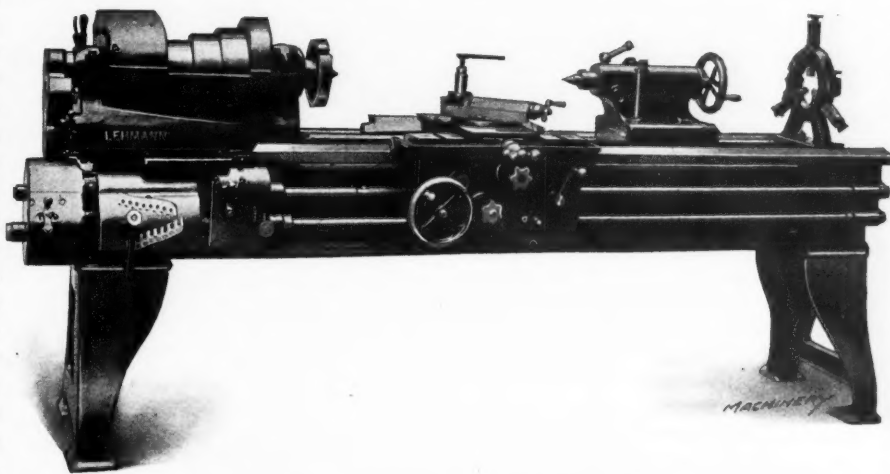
Lehmann 16-inch Double Back-geared Engine Lathe
